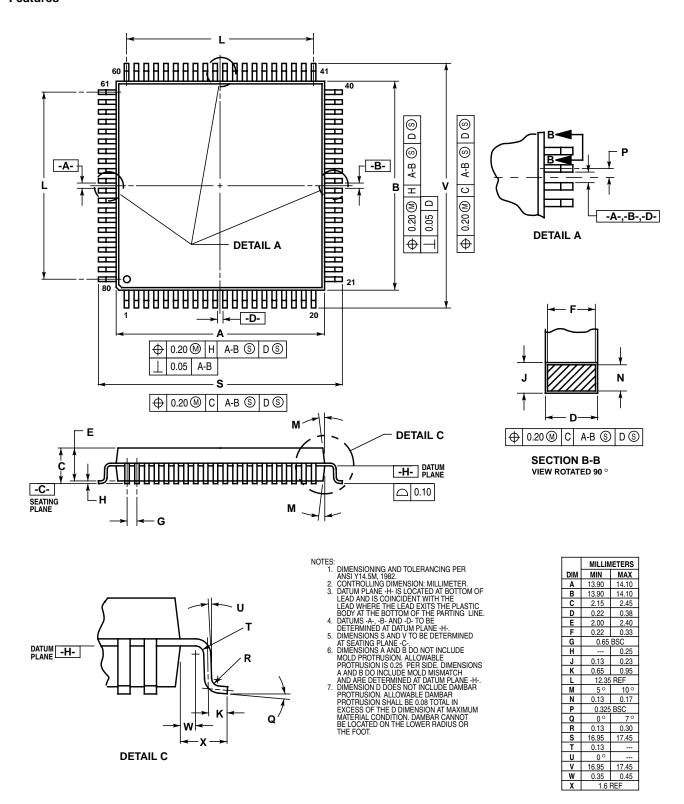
80-pin QFP Mechanical Dimensions (case no. 841B)
